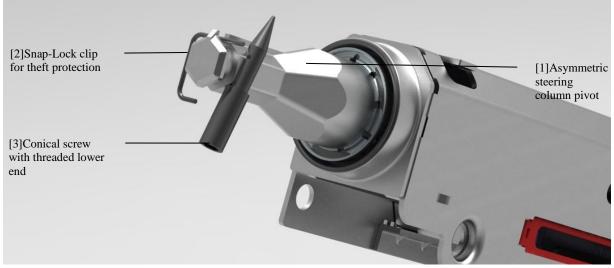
The final concept securing of the steering wheel, the illustration shows the steering column and steering column pivot isolated together with the conical shaped screw and Snap-Lock clip residing in the steering wheel.
